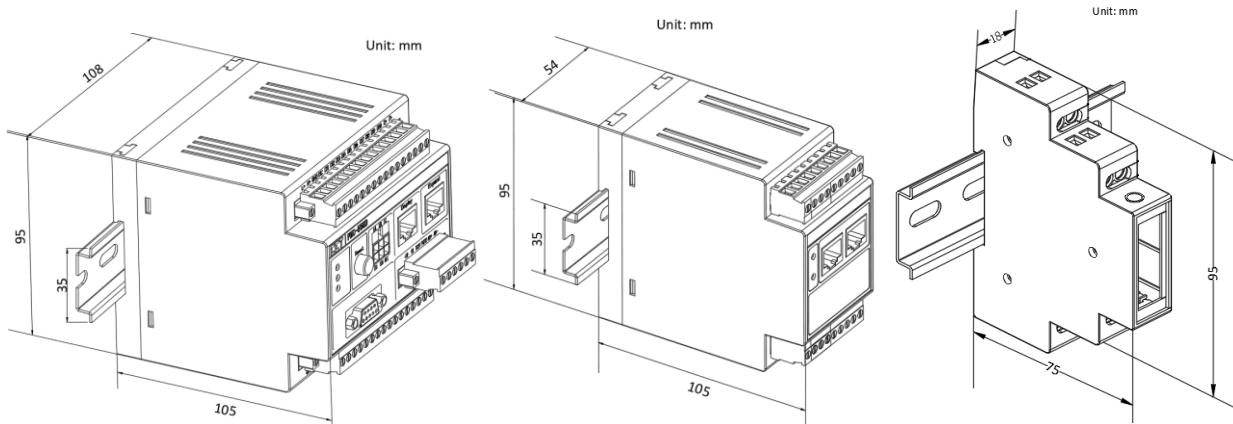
DIN Rail Mounting for Relay/Expansion Module
